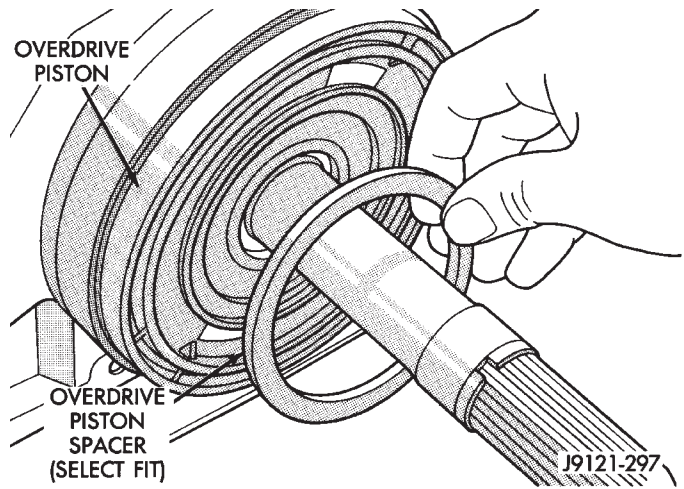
Overdrive Piston Thrust Plate Removal/Installation
